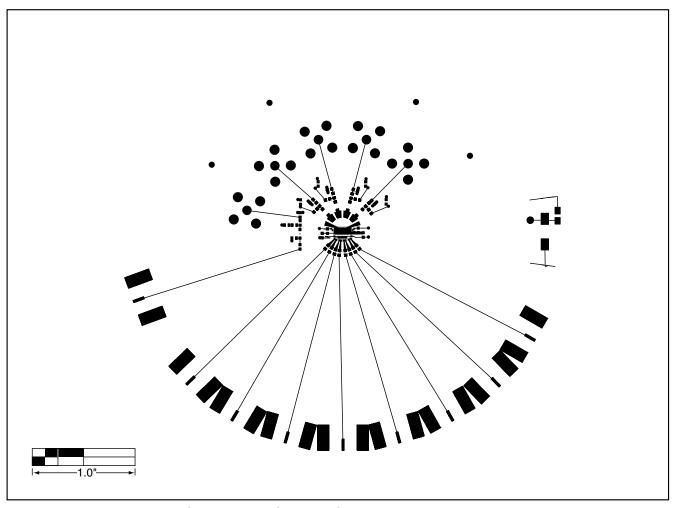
MAX3825 Evaluation Kit PC Board Layout—Component Side
